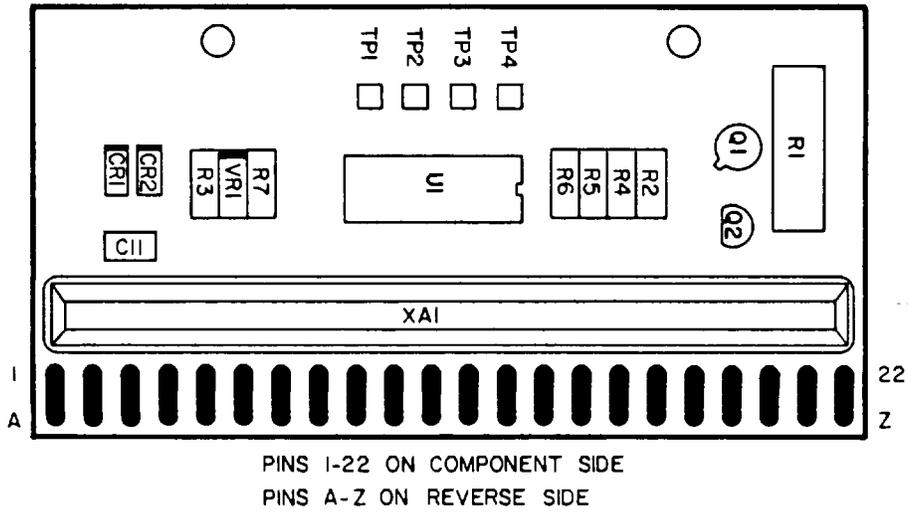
C. A1A3, +6V Switched Board Assembly, Components (CHANGE 9)
